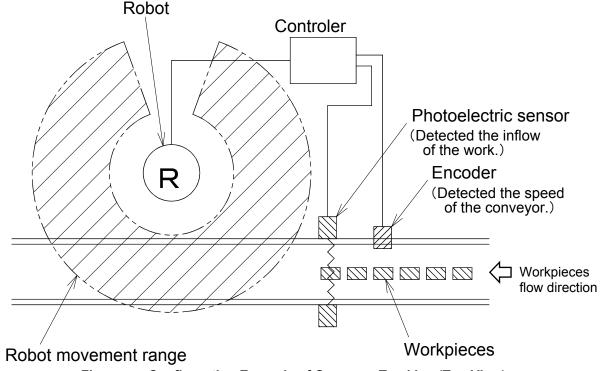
Configuration Example of Conveyer Tracking (Top View)
